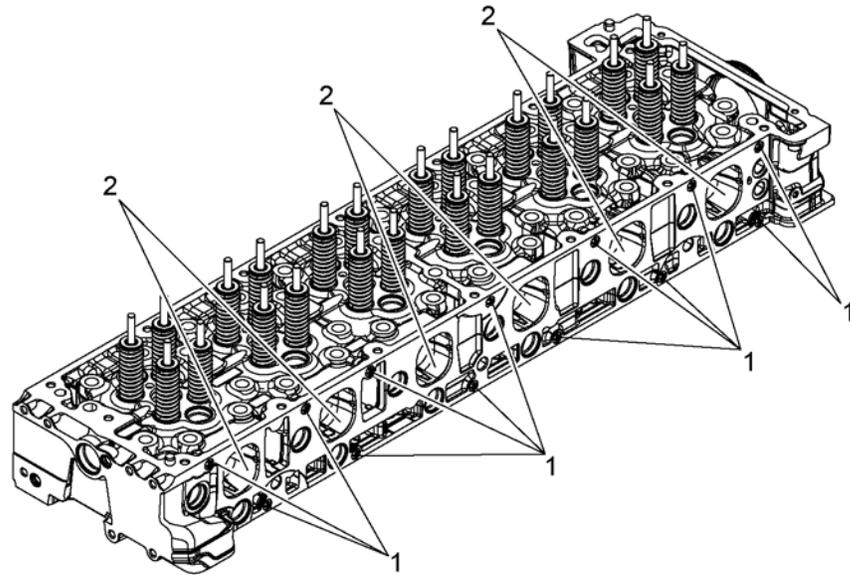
Water Hole Location on Fire Deck of Cylinder Head
